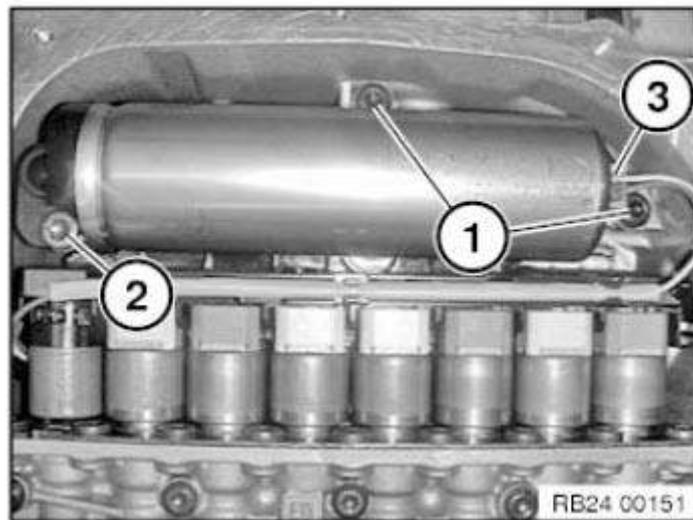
Identifying Oil Accumulator, Connector And Screw
